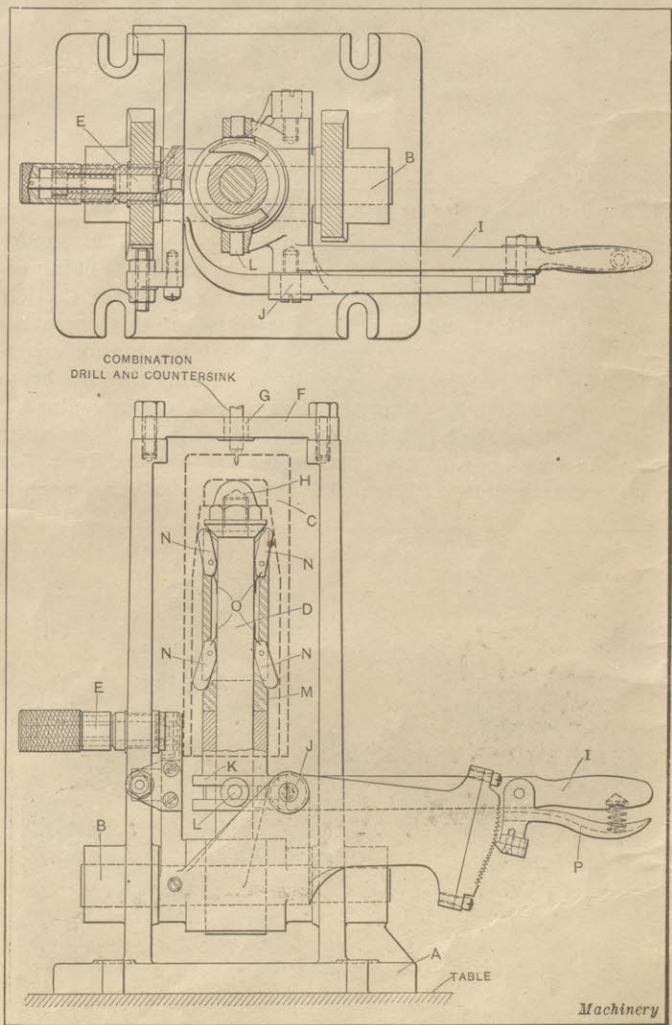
Fixtures used for holding Shrapnel Shell Forgings when drilling Center Hole in a 16-inch Prentice Ball Bearing Sensitive Drilling Machine
